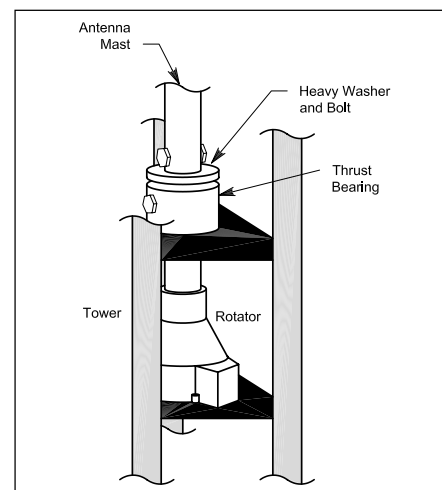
WA0KKC adds a washer and pin to insure against thrust bearing failure.
